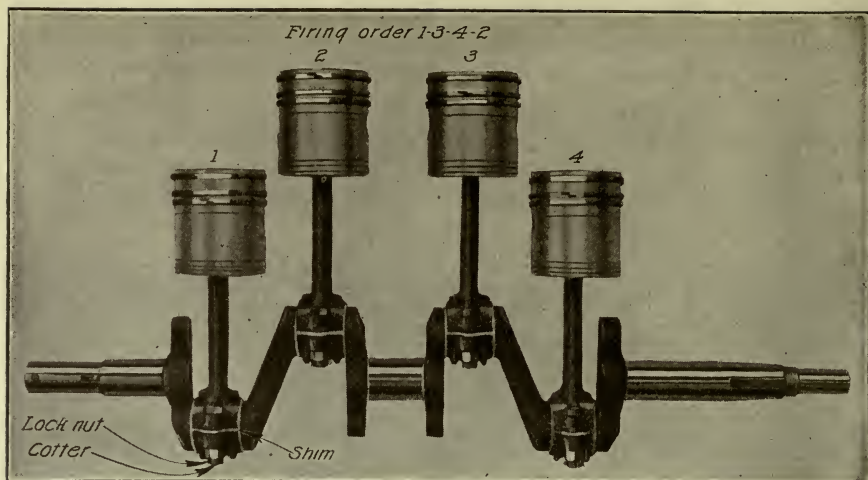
Three bearing 4 throw crank shaft with pistons and rods assembled (Reo).
